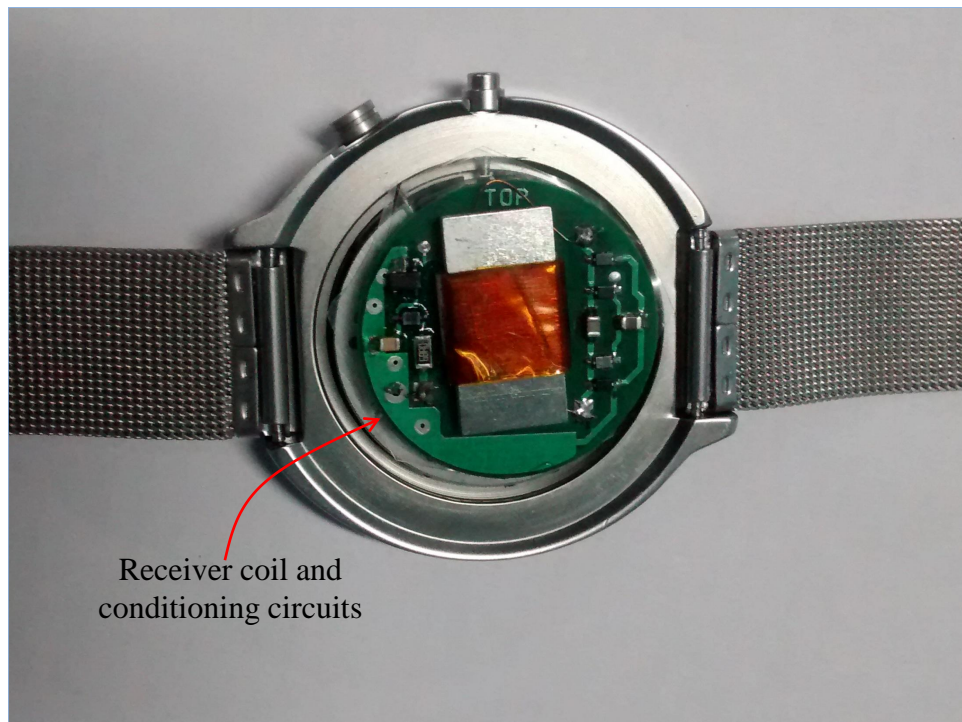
Receiver circuit fabricated on PCB and fixed inside the watch. Picture taken without back plate to show the receiver part
